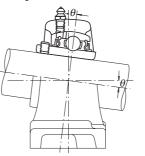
Permissible Misalignment of Spherical Roller Bearings
